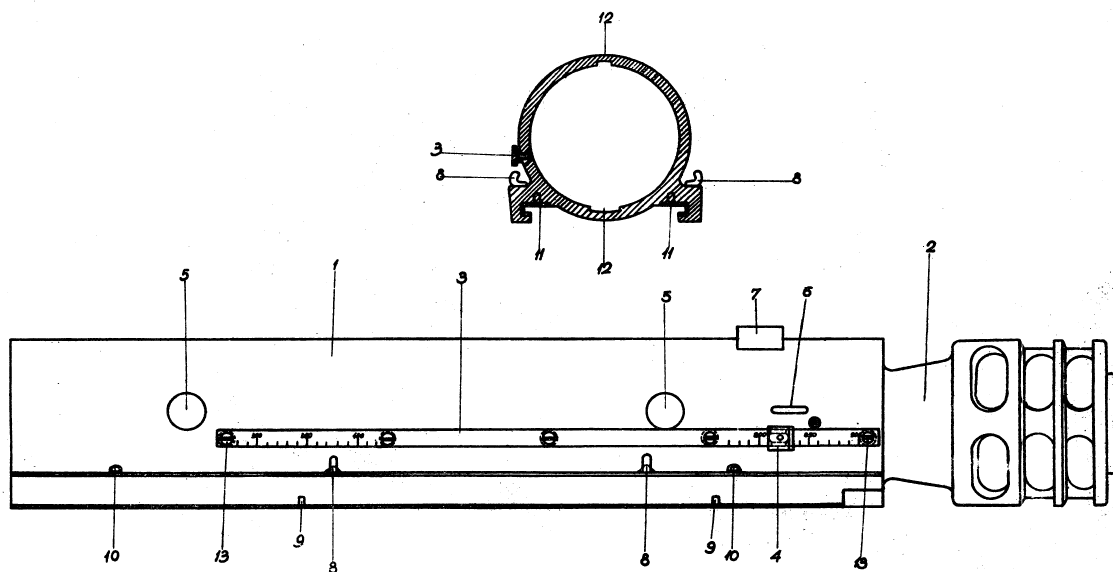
MANTLE WITH THE MUZZLE BRAKE — ASSEMBLY
